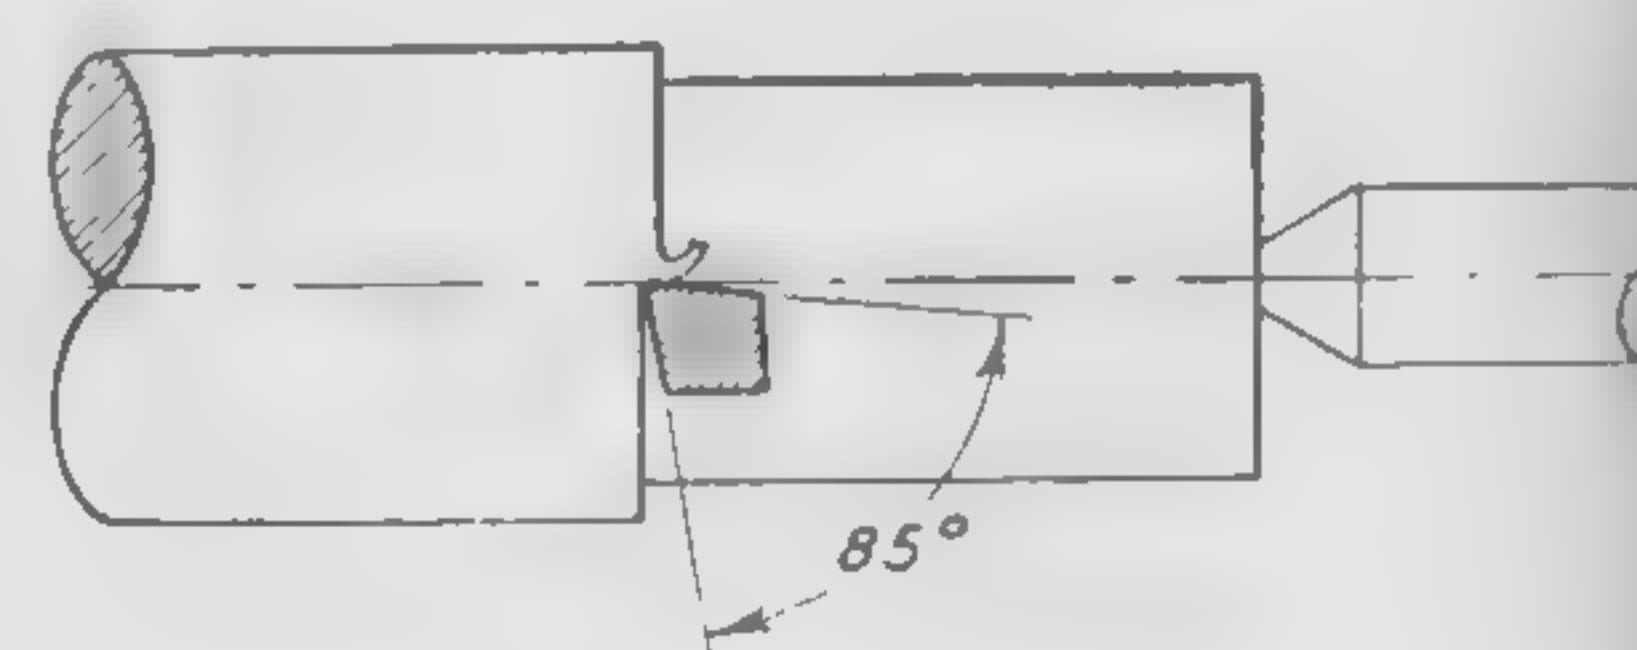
Tool Angle for Machining Very Hard Cast Iron
